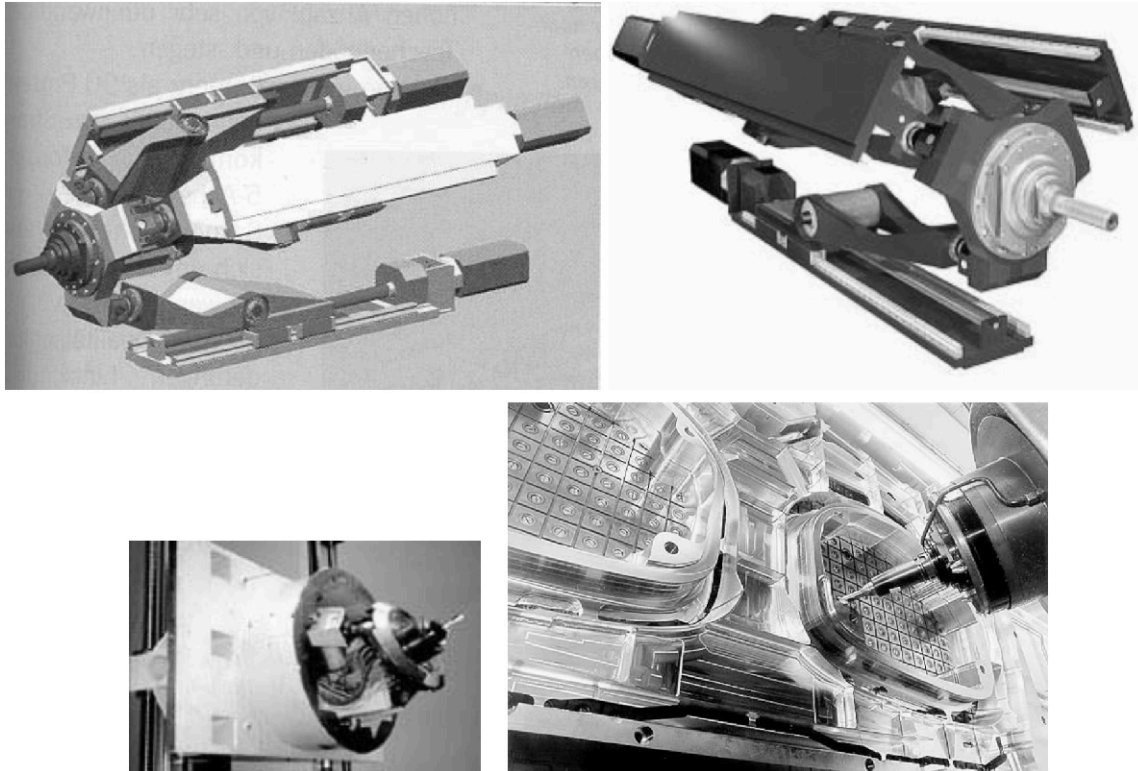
Sprint Z3 parallel kinematic tool head [50]
